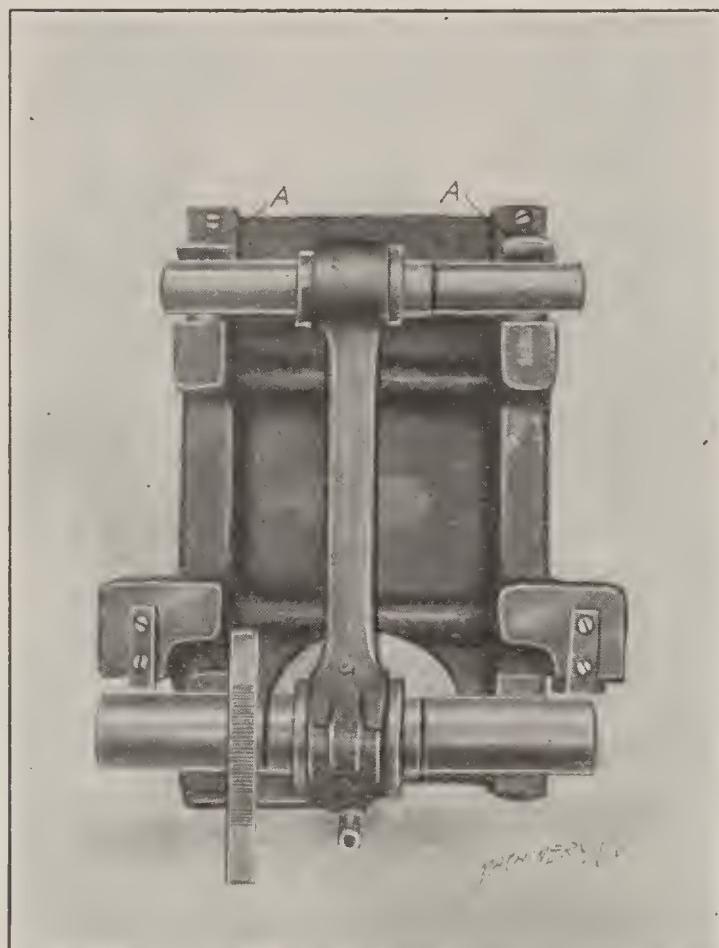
Fixture for Testing the Parallelism of Connecting-rod Bearings
